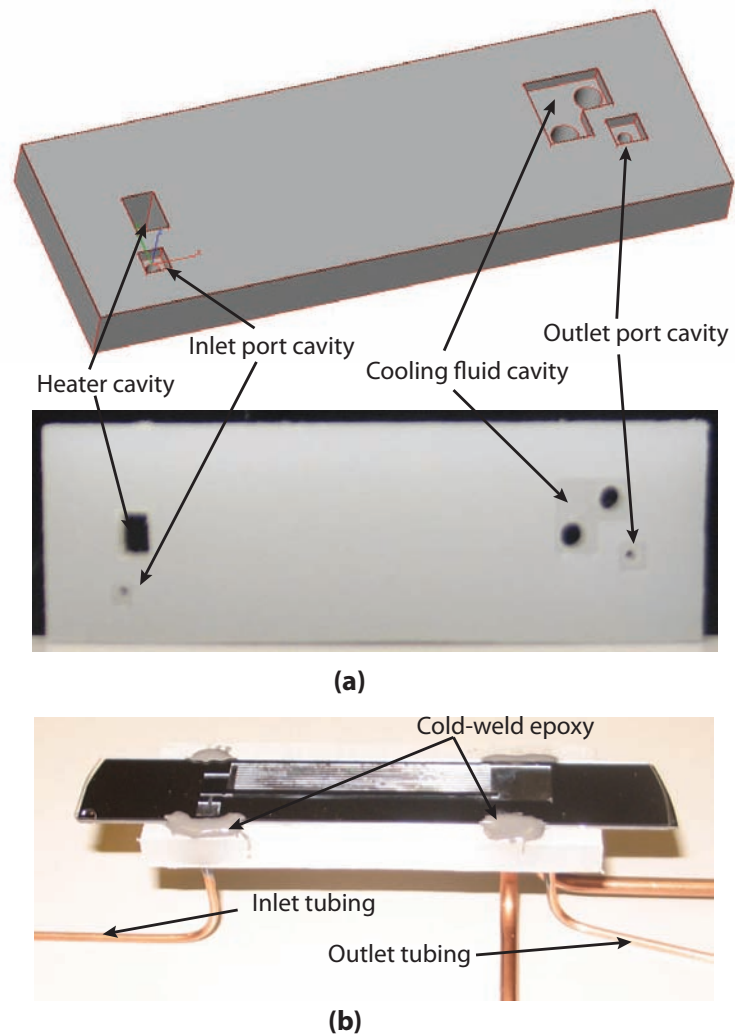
Cold-welded plastic packaging (Method III): (a) A base is machined out of plastic, with cavities that can interface with the μ LHP fill holes. The cavities lead to smaller holes, which are interference-fitted with copper microtubing. (b) A cold-weld epoxy is spread around the cavities, and the μ LHP device is placed on top of the plastic base, making sure the device fill holes align with the base cavities. More epoxy is used on the top to increase the mechanical strength of the package.
